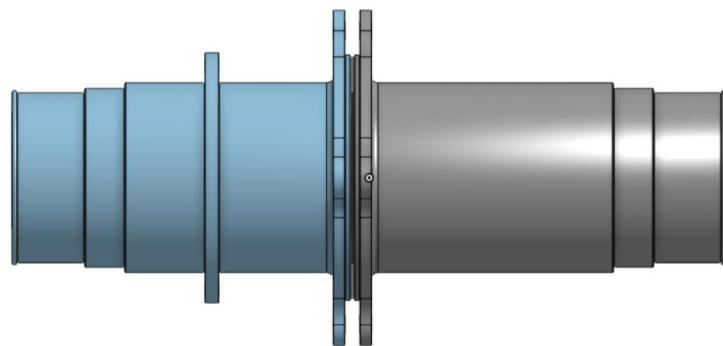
NU 24 Spool Initial Design. (LHS Brake Side Tripod Housing, RHS Drive Side Tripod Housing)
